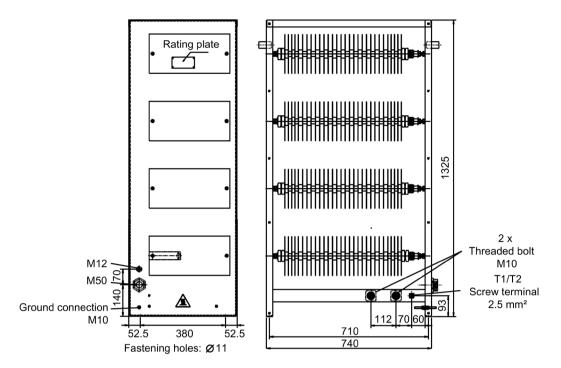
Dimension drawing braking resistor 50 kW/250 kW
